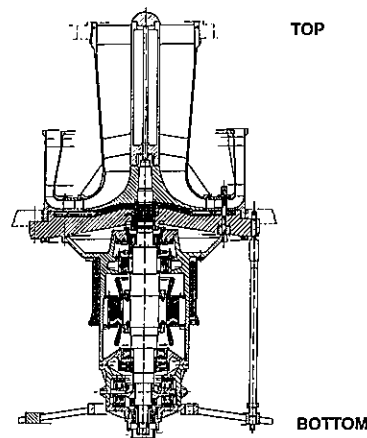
Coolant gas circulator prototype MALVE (5300 r.p.m, overhung impeller wheel, 1,25 m diameter, rotorweight 2 t, power input 400 kW)
